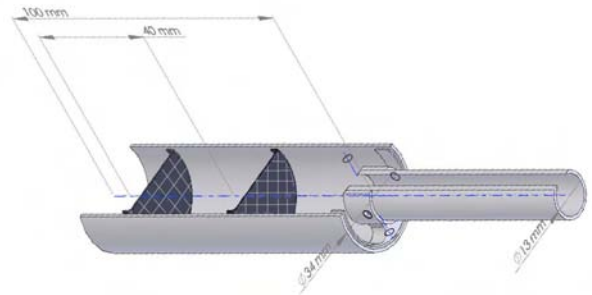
Technical drawing of the mouthpiece, used to homogeneously pack the column
